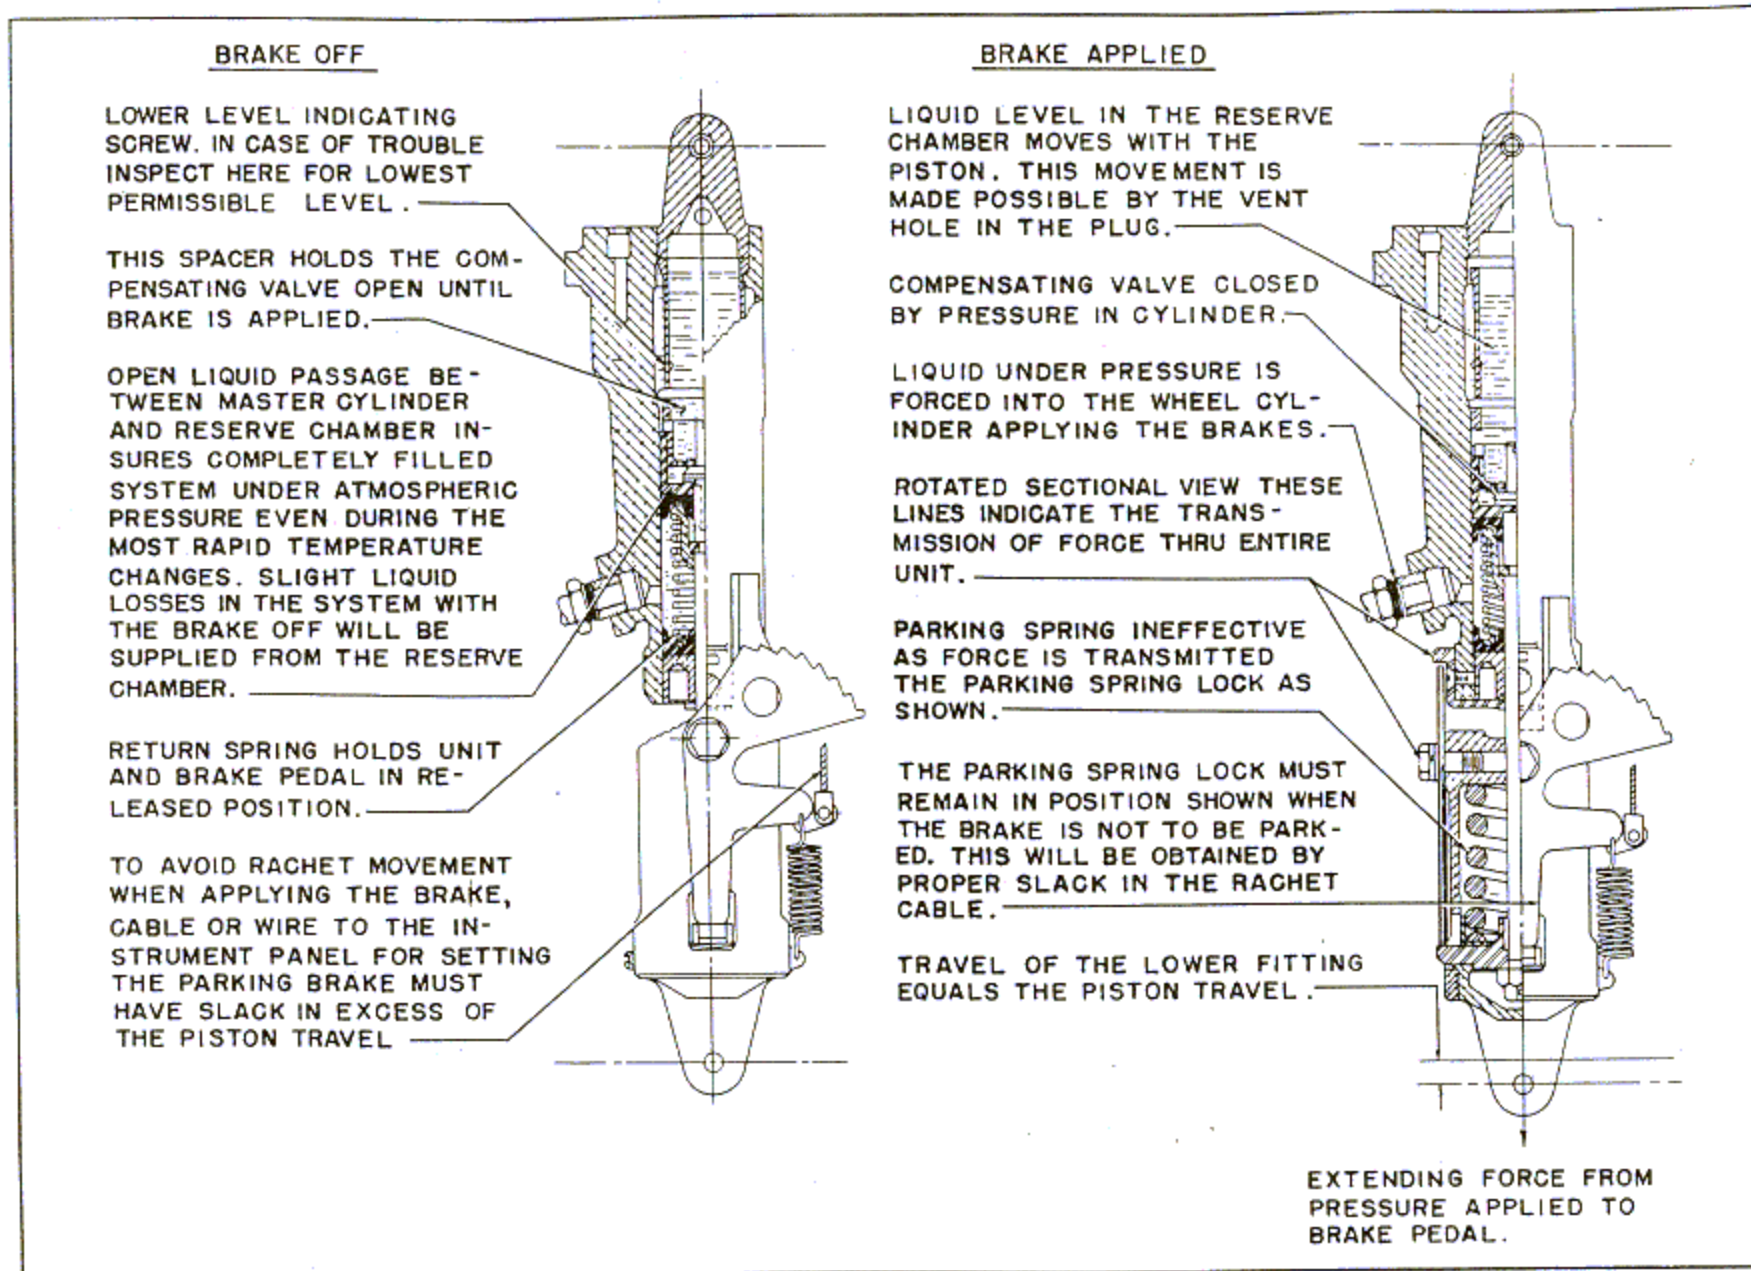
(Sheet 1 of 2 Sheets)—Master Brake Cylinder—Detail Operation
